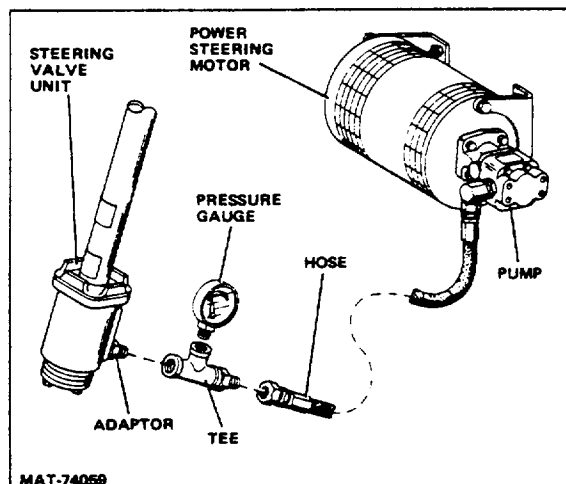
Pressure Gauge Location adjustment. Refer to following Paragraph F.
